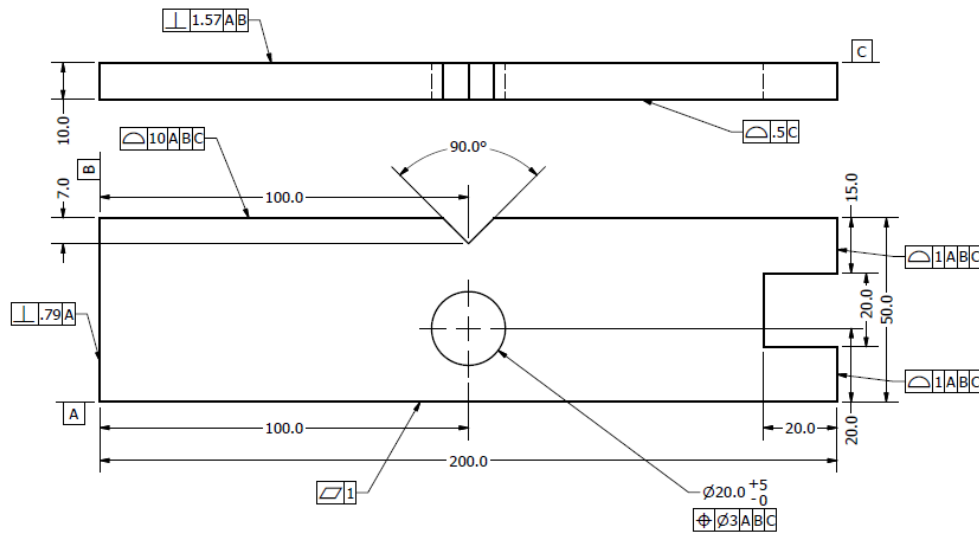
Adding the dimensional tolerance to the guide hole.
